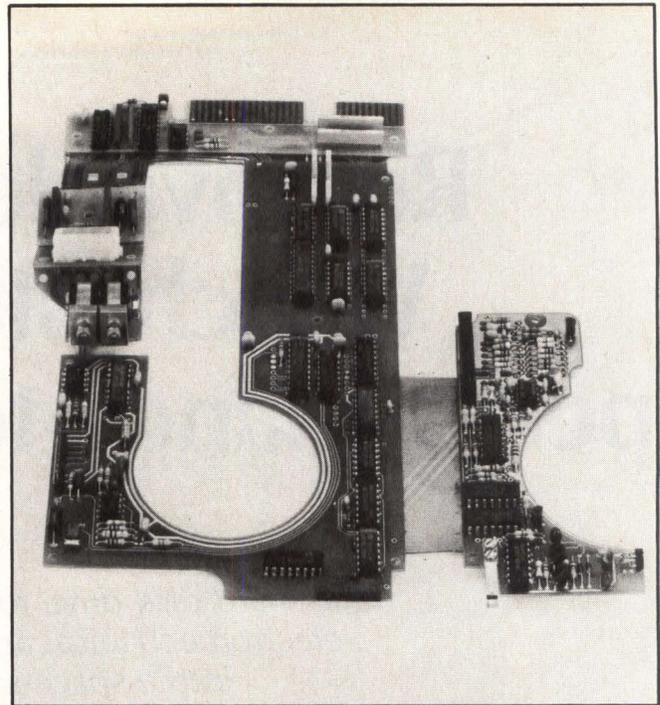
A folded PC consists of a flat sheet of flexible film bonded to oddly shaped PC-type boards. Component insertion, flow soldering and circuit tests are performed before the PC boards are snapped out of a flat sheet of PC material. Unsupported film acts as flexible hinges (lower right), allowing the folded PC to bend, so that the two component sides face each other. This "double-decker" PC board assembly is then fitted around the drive components; the drive motor fits into the hole area.
